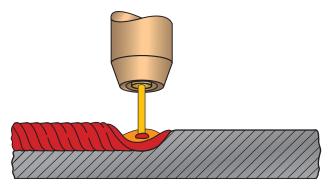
Buried-arc transfer. Wire tip is with the weld crater. Spatter is trapped.
